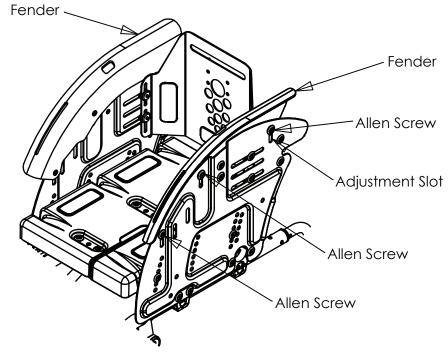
FENDER HEIGHT ADJUSTMENT
